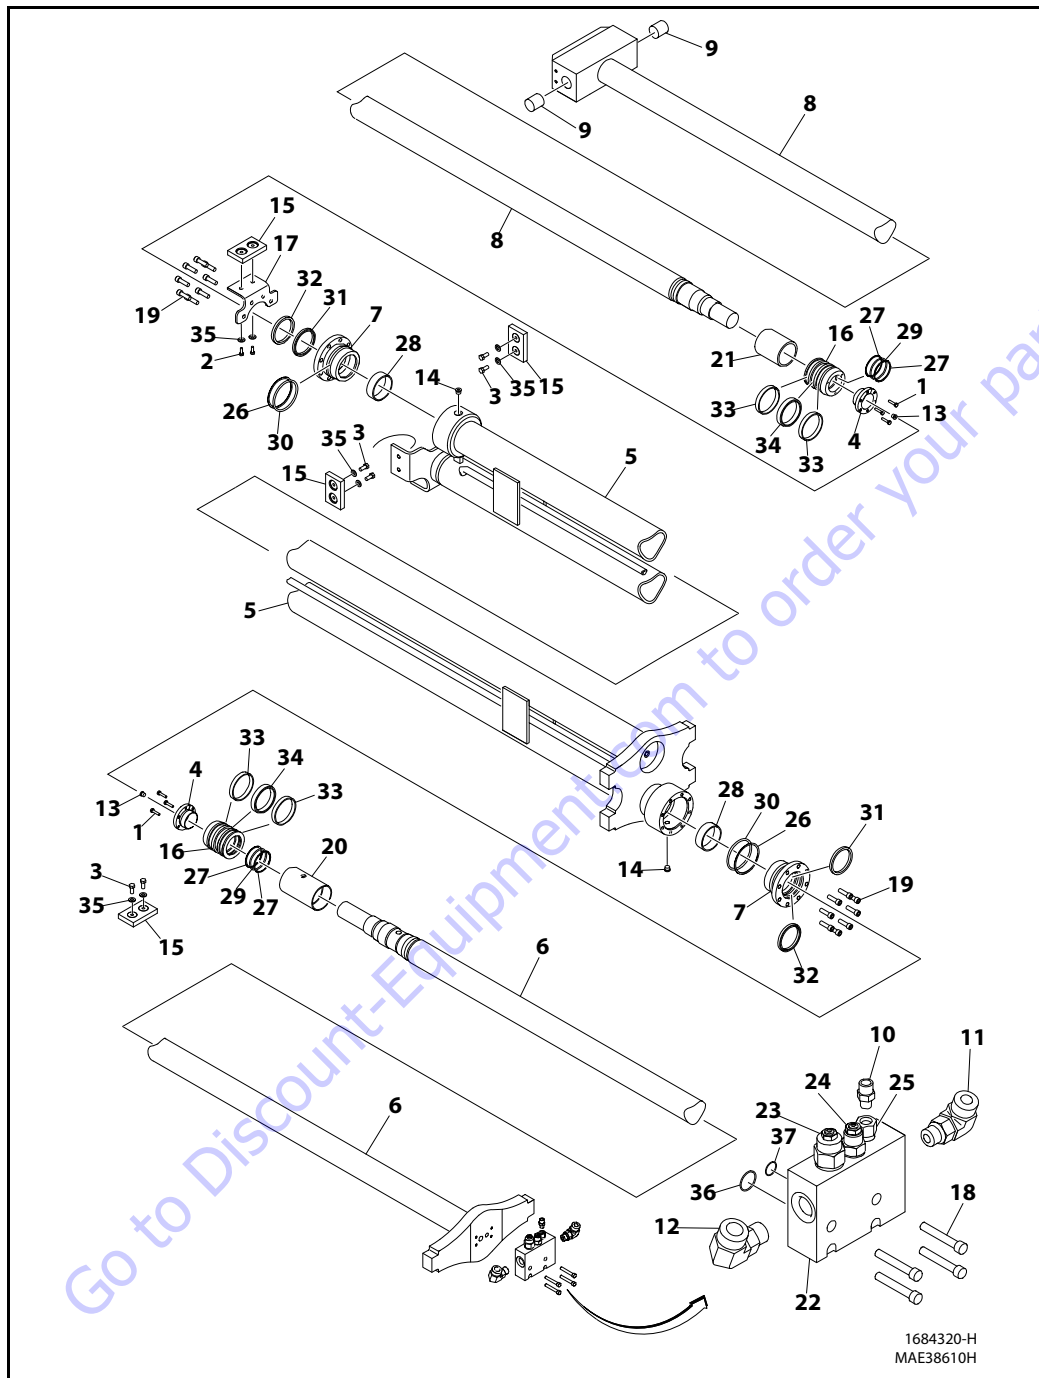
Steer Cylinder (SN 0300201017 through 0300238558)
